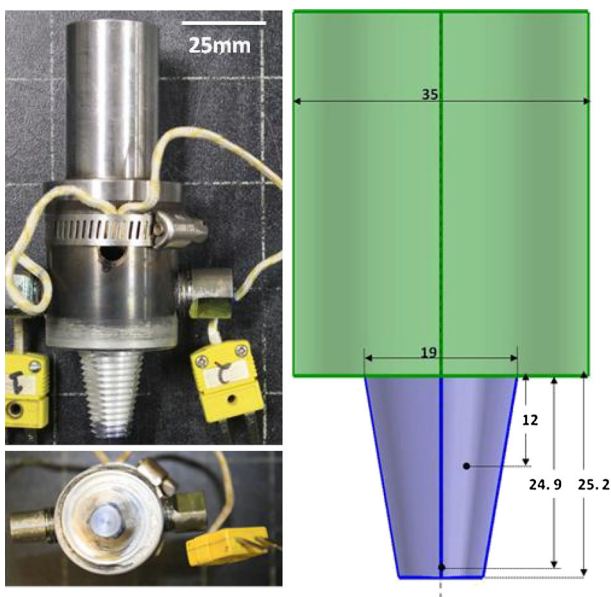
Left: tool used for the welding. Right: sketch shows the probe and the shoulder only. Black dots indicate the locations of thermocouples. All the dimensions are in mm.
